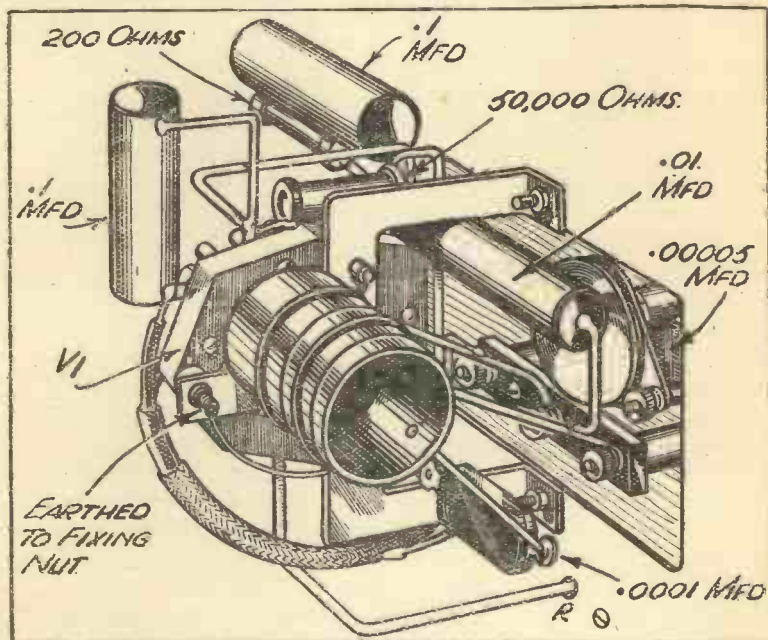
The method of mounting the X41 valveholder and the rest of the components associated with that part of the circuit will be apparent from this perspective drawing. Use it in conjunction with Fig. 171
